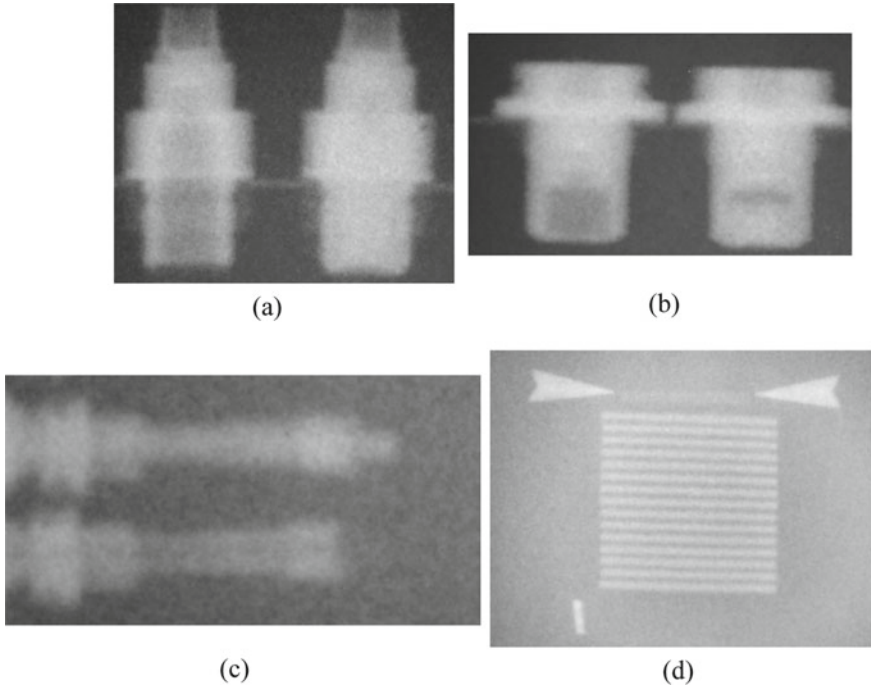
NR images (negative image) of a cryo cartridge, b bolt cutter, c explosive transfer assembly tip, d explosive manifold leads
